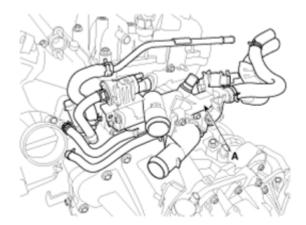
Identifying Water Temperature Control Assembly Courtesy of KIA MOTORS AMERICA, INC.
